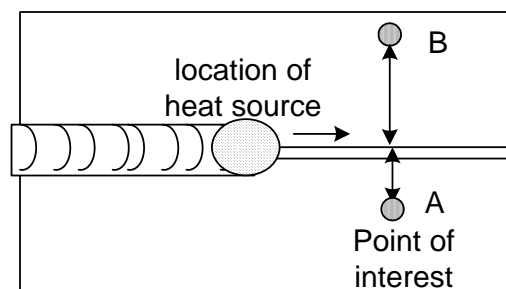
Schematic of welding showing location of two points A & B
